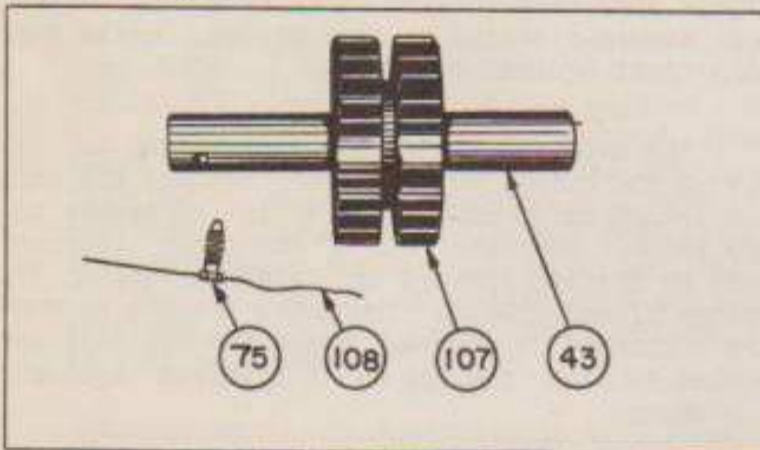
REVERSE IDLER SHAFT & GEAR
